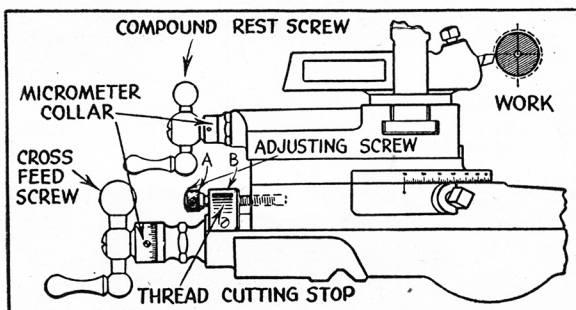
Thread cutting stop attached to dovetail of saddle.
